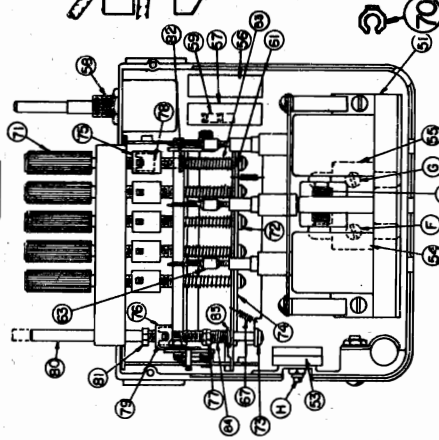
PARTS LAYOUT--DASH UNIT--Bottom View
